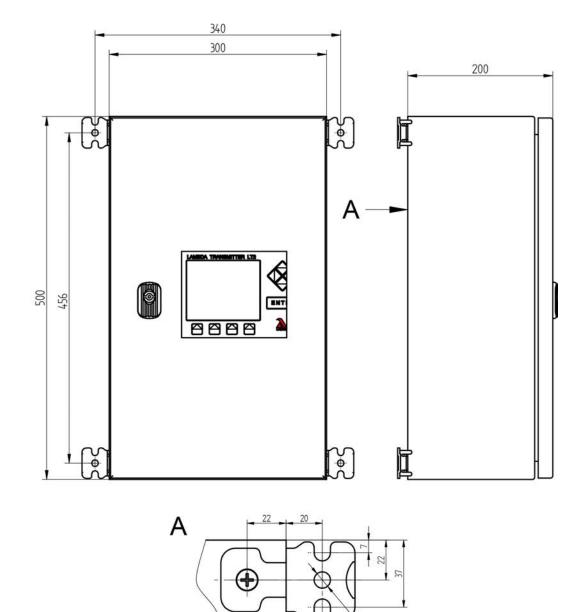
Dimensional drawing LT2 in wall mounting housing with reference air pump
